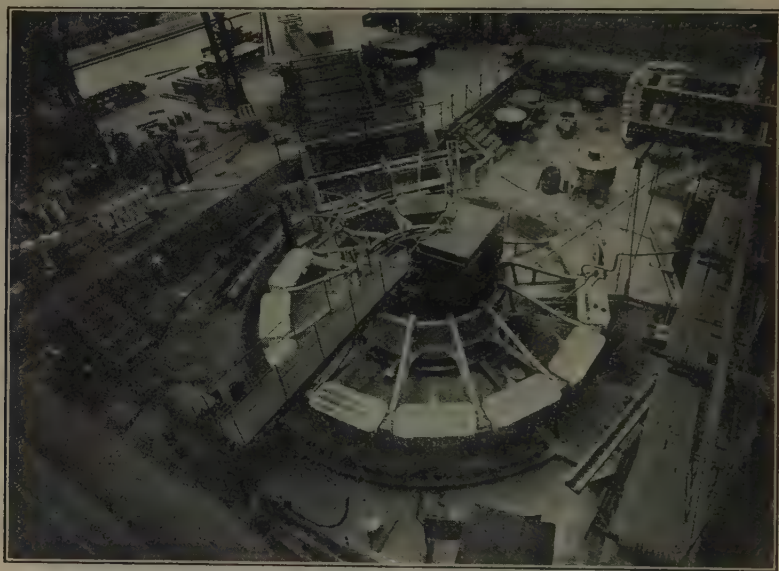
CASTING AISLE FROM BOILER PLATFORM.
